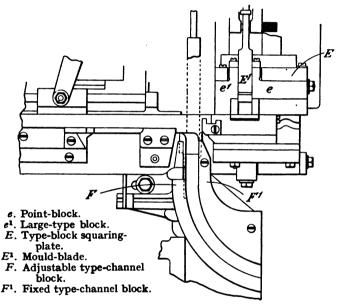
Monotype casting machine; large-work mould-delivery and raceway.
